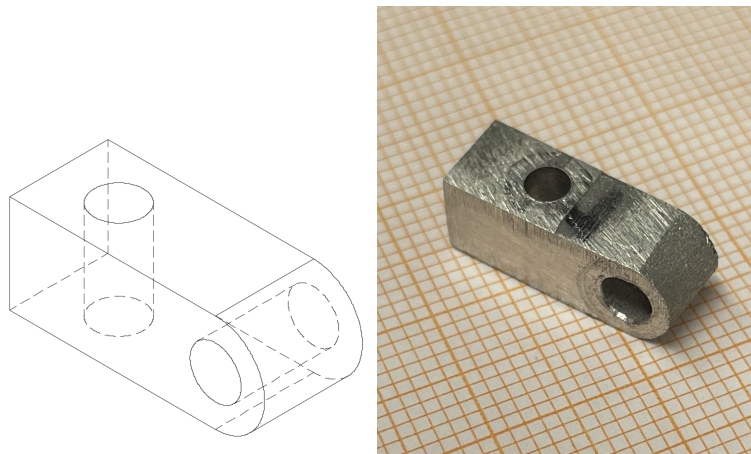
CAD Drawing (left) and as constructed (right) fore bulkhead hinge
